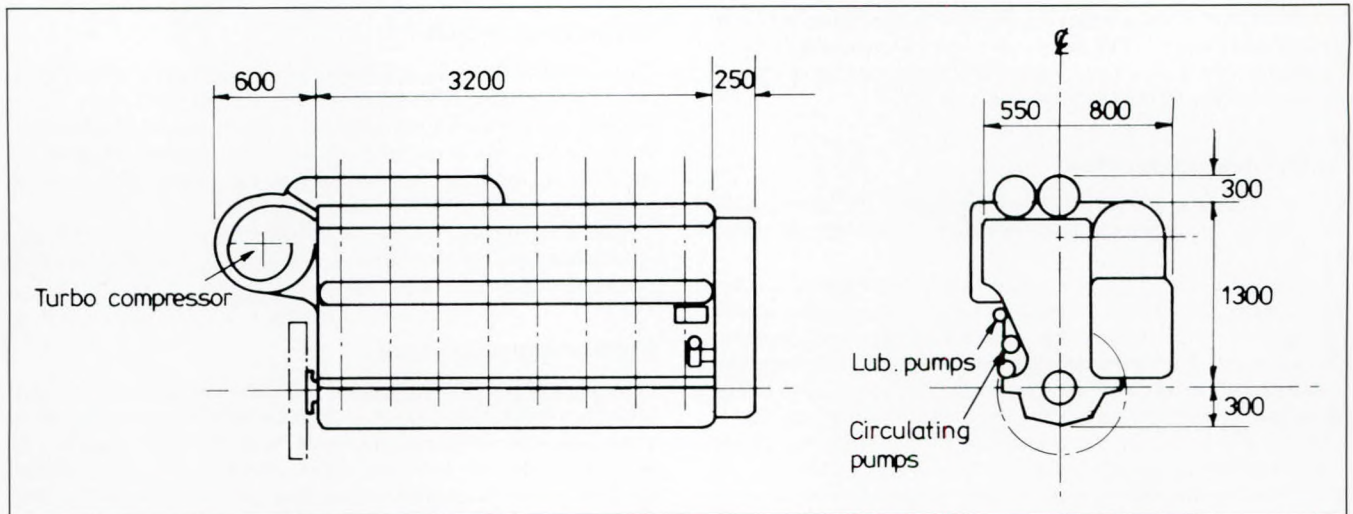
Outline of eight-cylinder turbo-recompressed steam reciprocating engine of 3000 kW output
